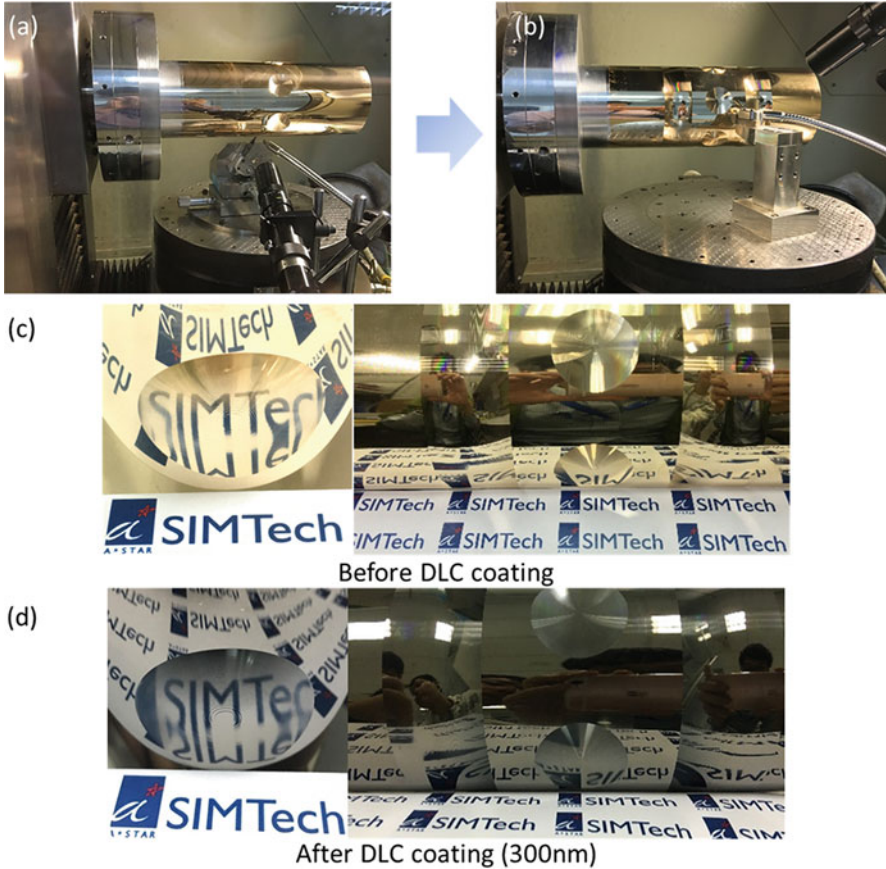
(a) Machined radial Fresnel lens, (b) machined linear Fresnel lens, (c) roller mold before and (d) after DLC coating (Zhang et al. 2018)
